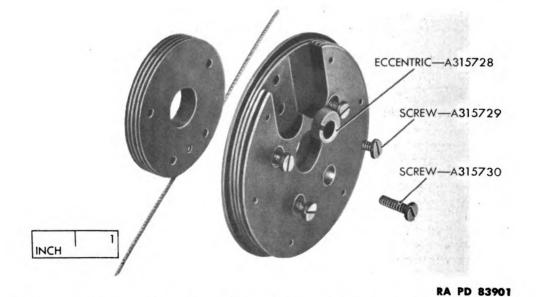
Small Pulley Exploded From Double Pulley Assembly
